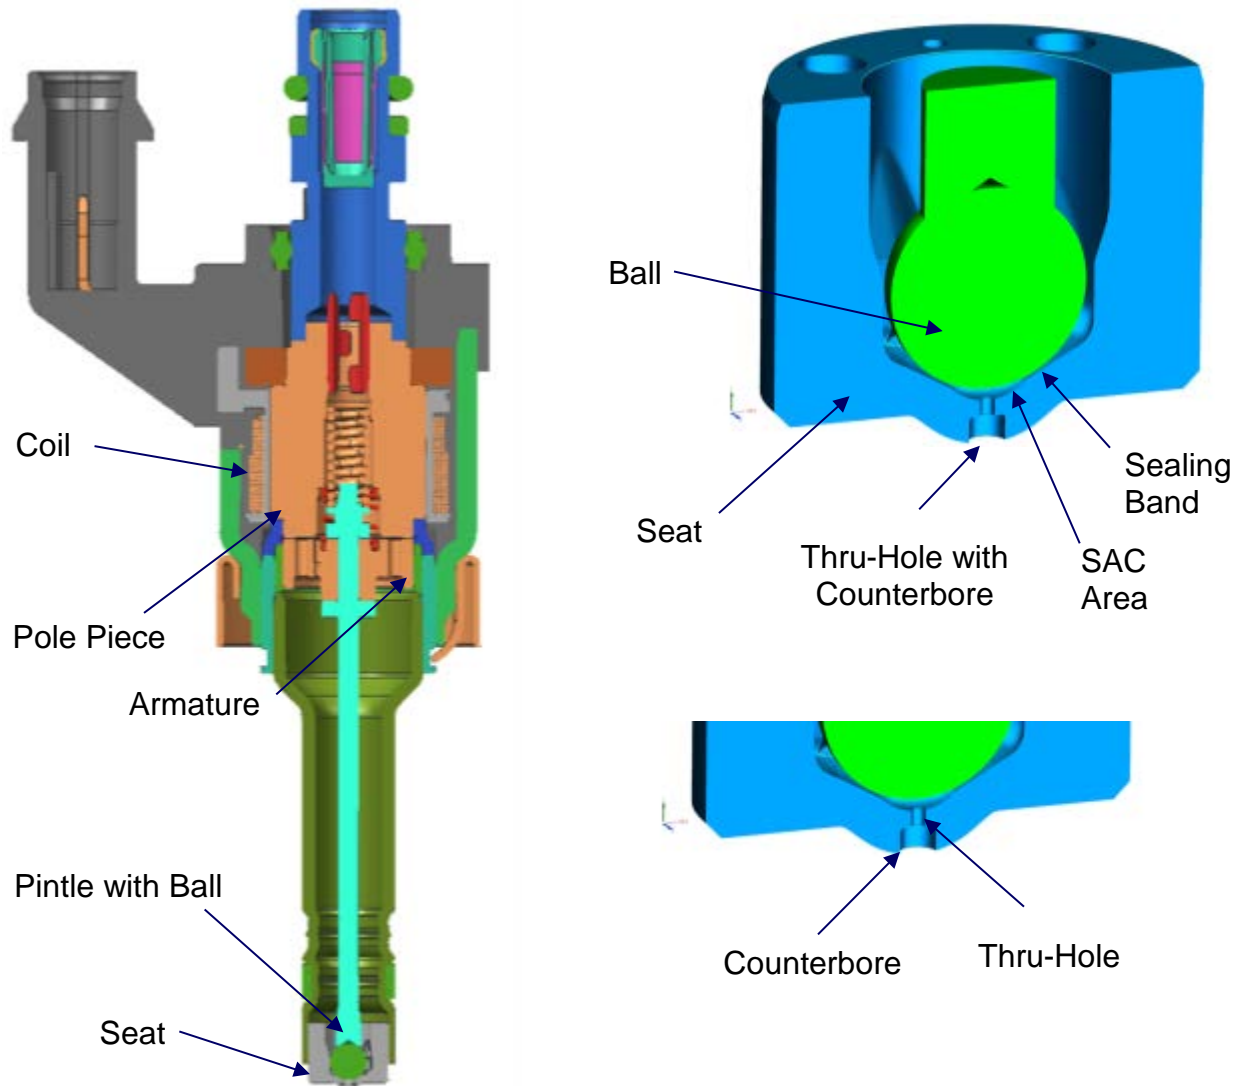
Cross-section views of GDI injector and Seat Nozzle geometry
